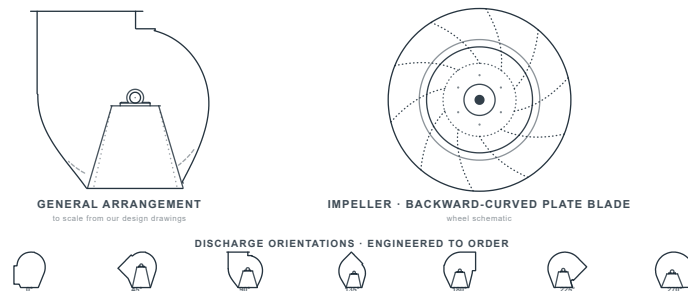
General arrangement, impeller face and the discharge orientations we build — drawn to scale from our in-house design drawings. Every fan is engineered to your duty.
